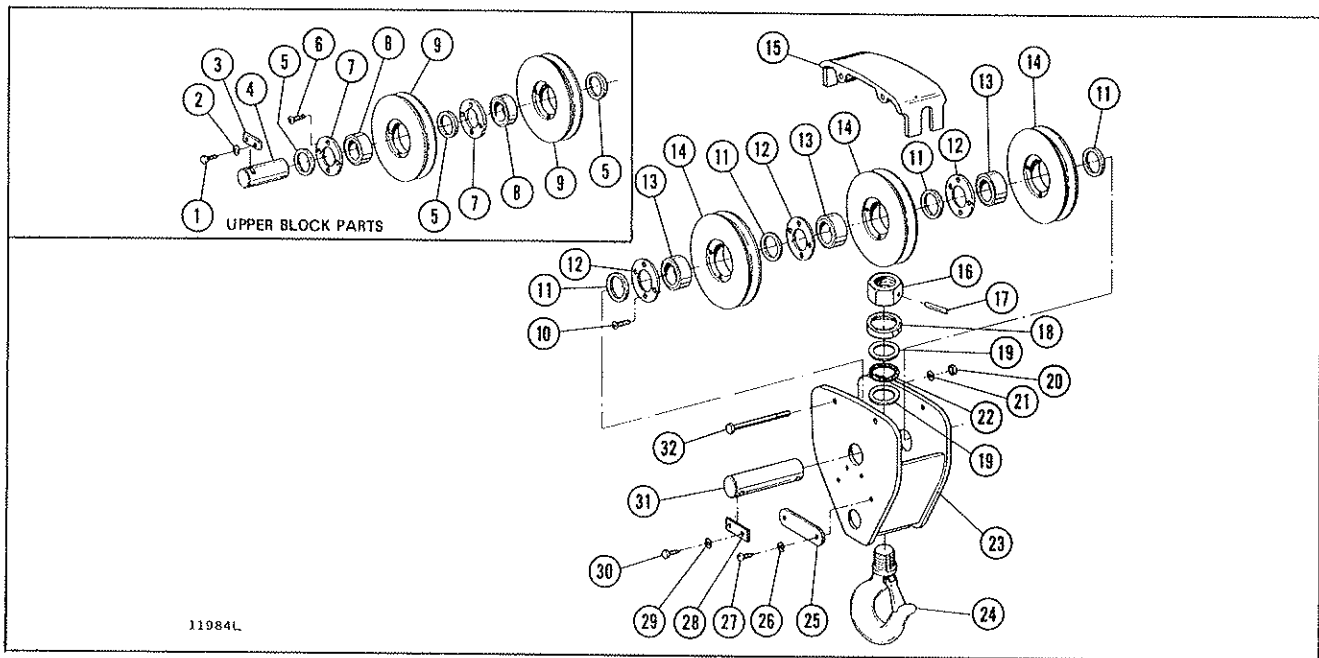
Upper and Lower Block Parts Including Hoist Rope.
